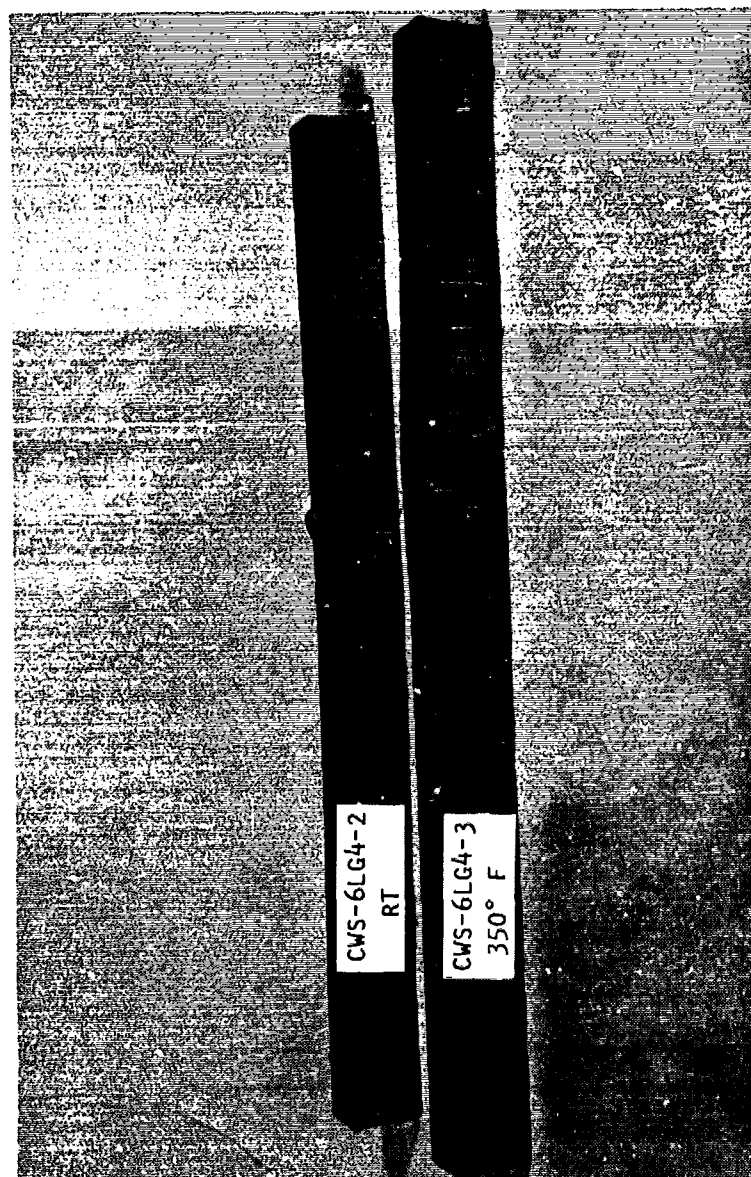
Compression Sandwich Bending Beams With Type AS/3002 Batch Graphite/Epoxy Face Sheets,
